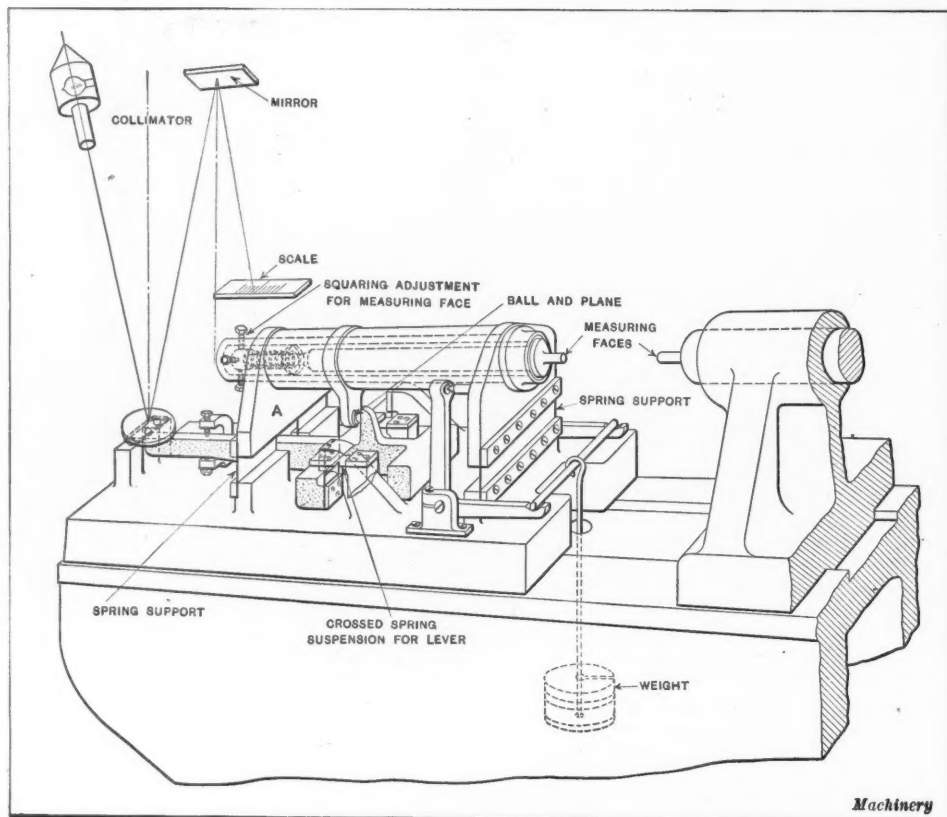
Mountings of the Adjustable Measuring Anvil of Four-inch Comparator, and Optical Arrangement employed
